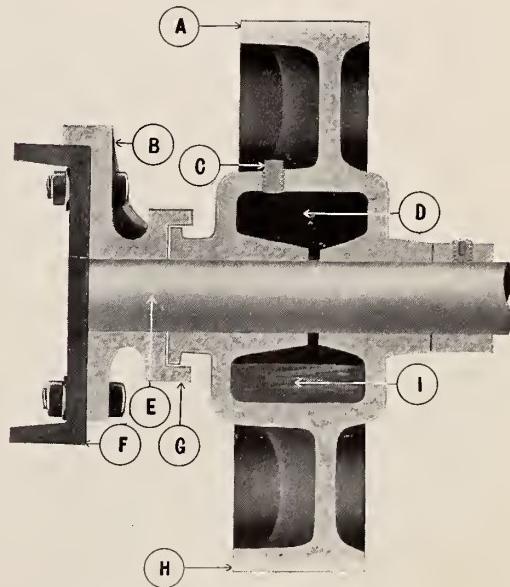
Sectional View of Self-Oiling Drum Roll.
